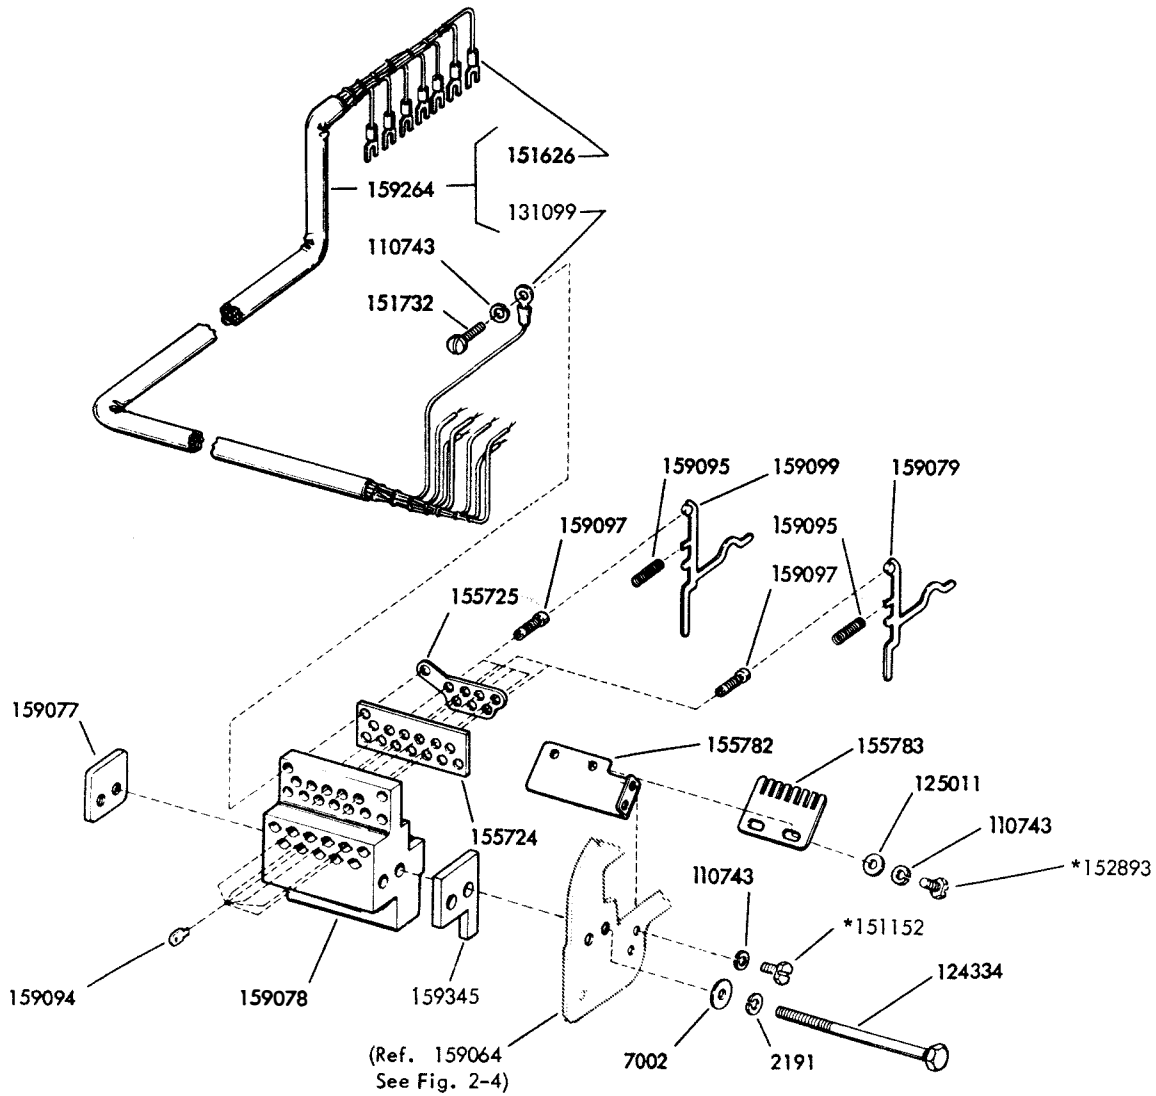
VERIFIER CONTACT ASSEMBLY - VIEW 2
